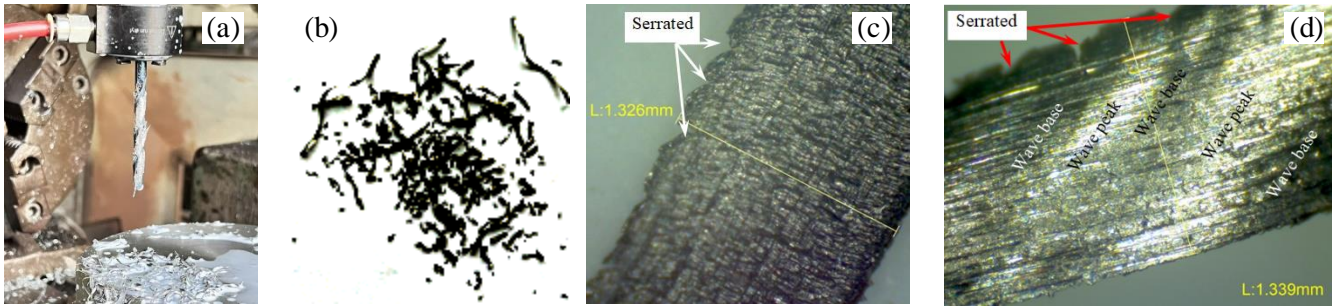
(a) Drill bit after retraction, (b) Chip morphology, (c) Chip free surface, and (d) Chip contact surface, observed when drilling under conventional emulsion lubrication.
